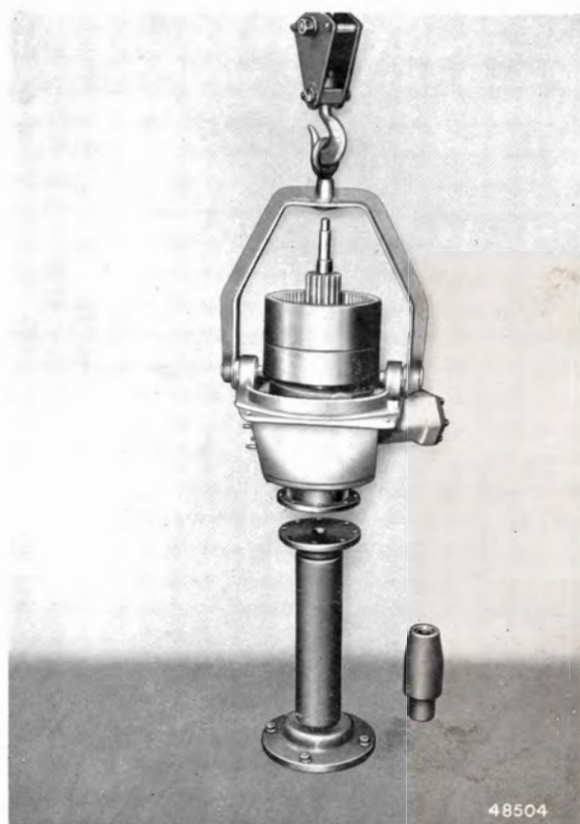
LOWERING THE FRONT COVER ASSEMBLY TO STAND
